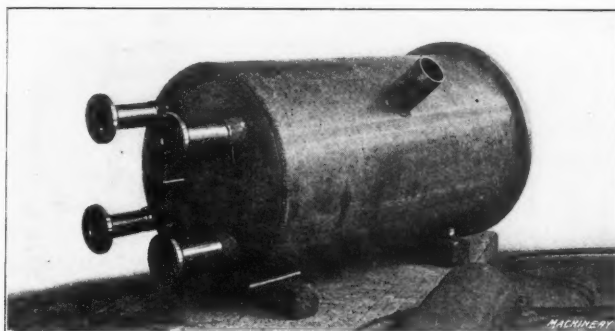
Head, Flange and Branches welded in a 42-inch Tank with the Metallic Arc
